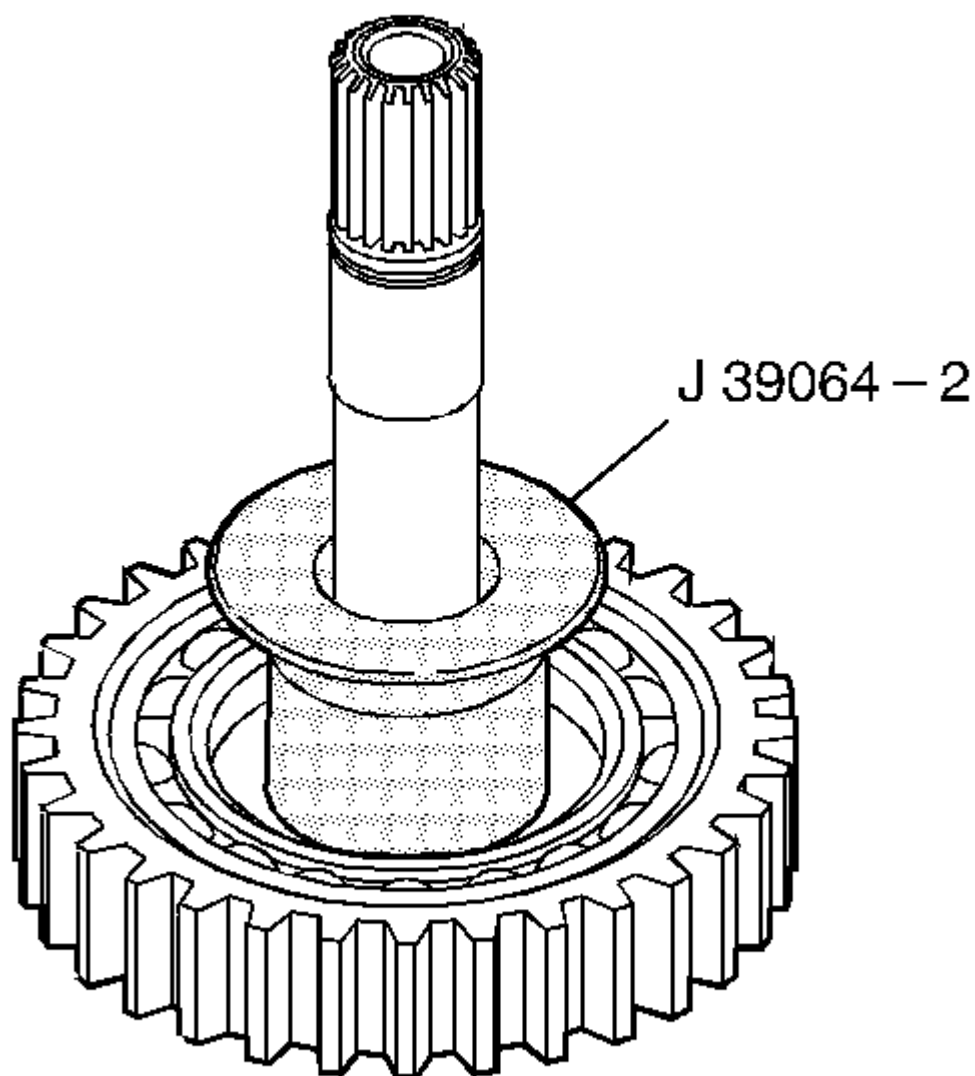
Seal Sizer Over The Drive Sprocket Oil Seal Ring
